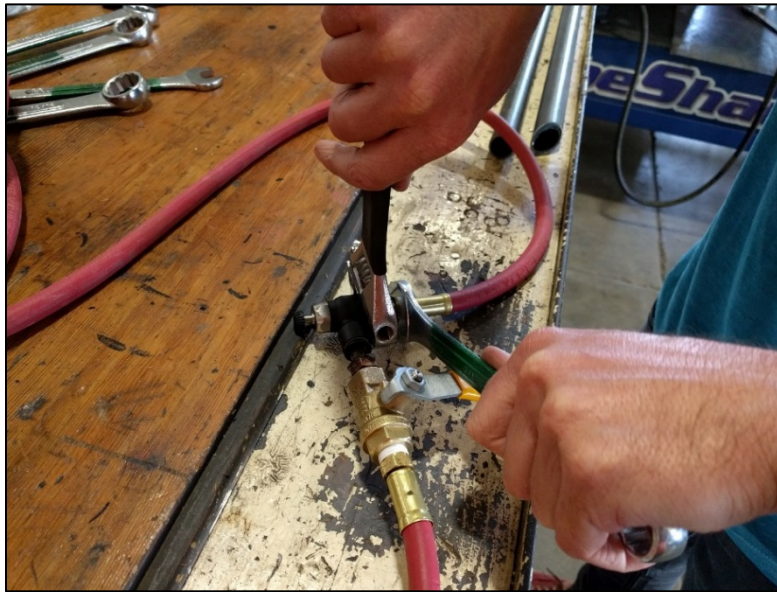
Brett installing the air flow control valve on the air line with wrenches to compress the Teflon tape.
